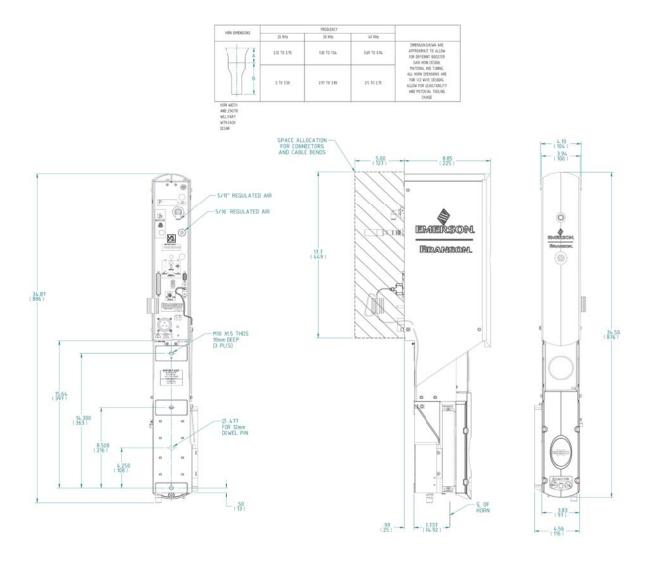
2000Xc Series Actuator Dimensional Drawing Hub
